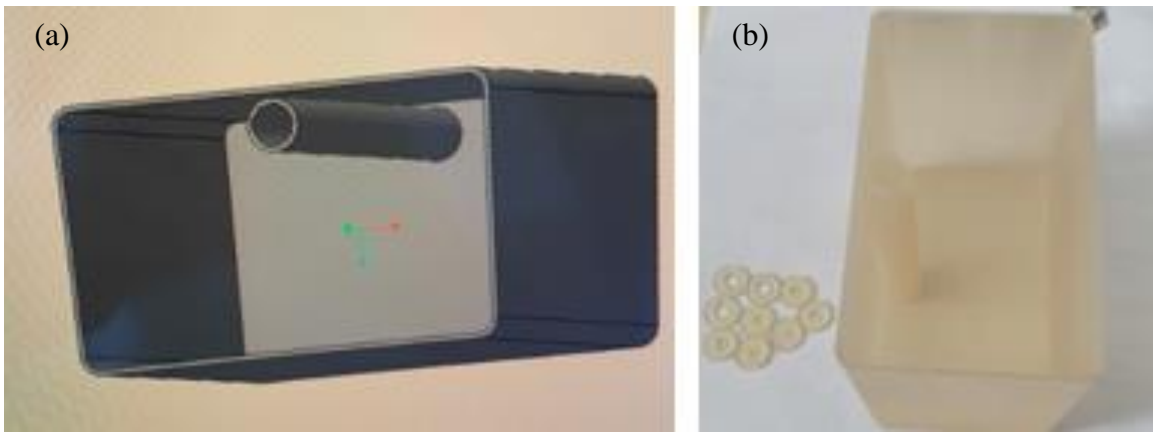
(a) Tissue model prototype disposable mold and (b) the hollow-shaped occlusion Samples
